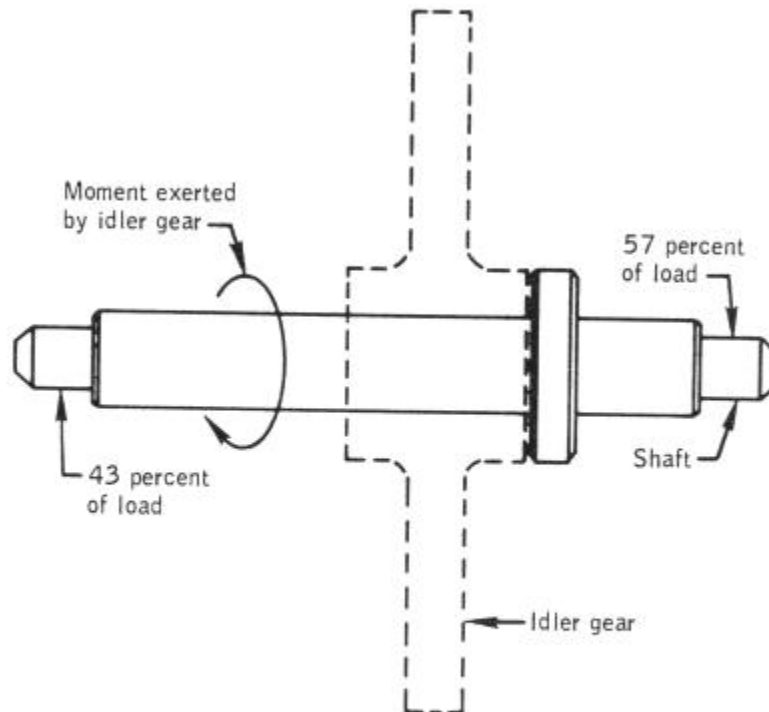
Forces on idler gear shaft in countdown mode.
